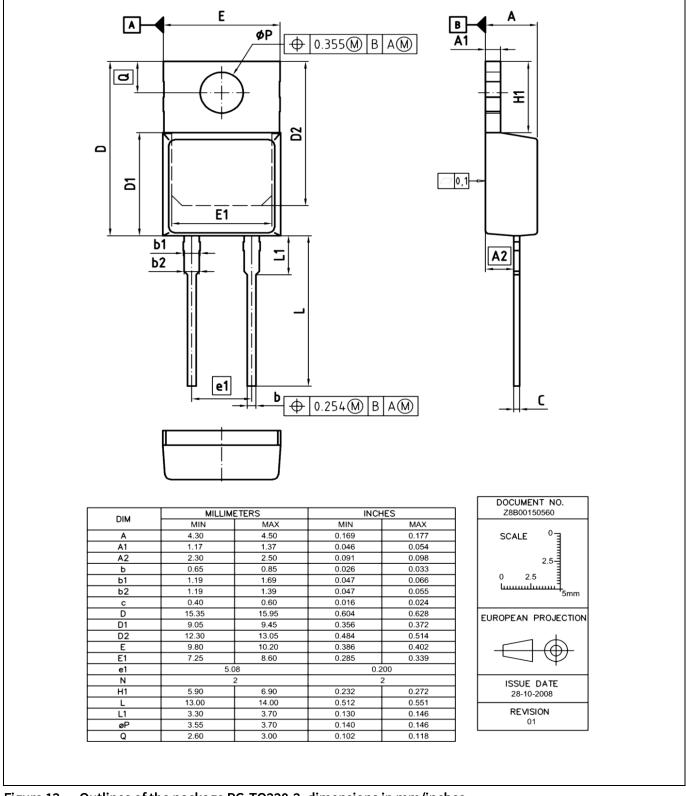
Outlines of the package PG-TO220-2, dimensions in mm/inches
